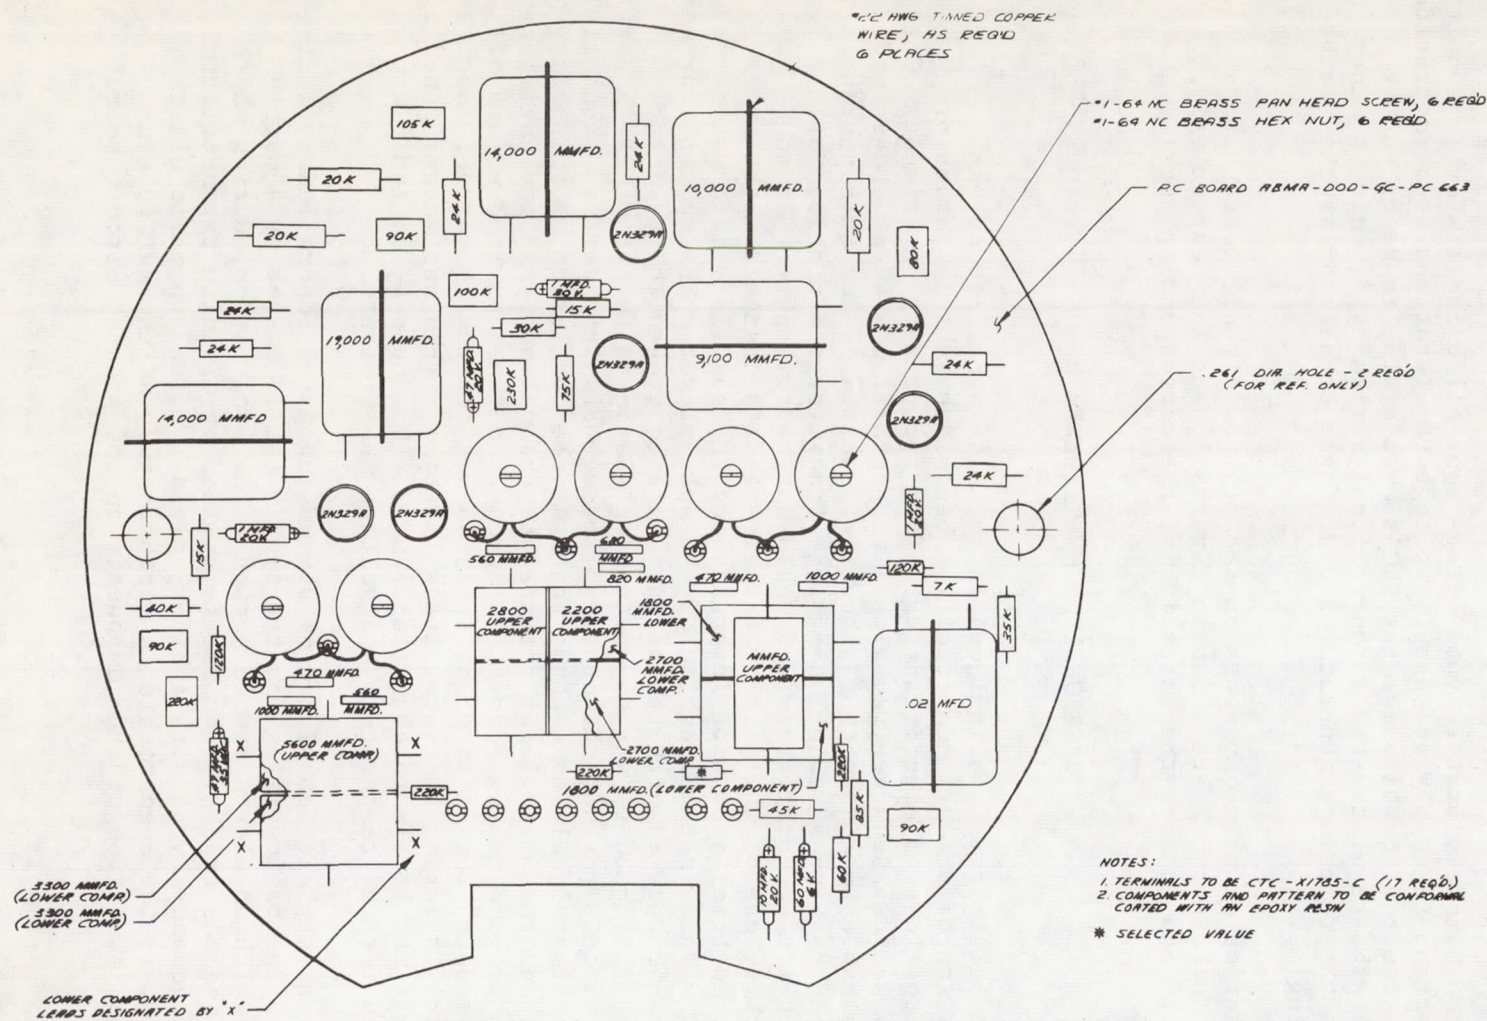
PRINTED CIRCUIT BOARD SUBASSEMBLY FOR SUBCARRIER OSCILLATOR DECK "A"
